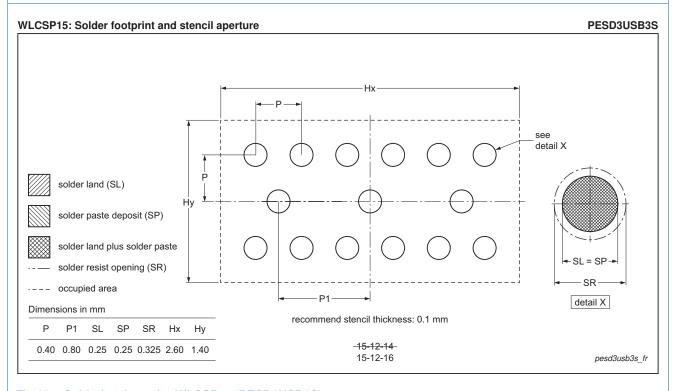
Soldering footprint WLCSP15 (PESD3USB3S)
